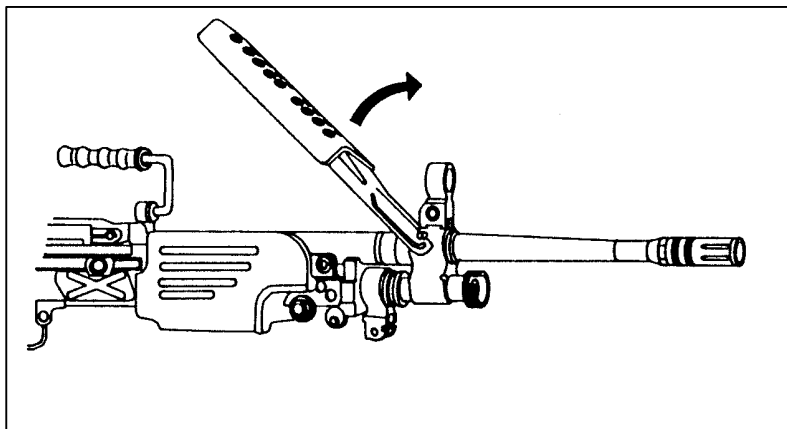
Removal of the operating rod, slide assembly, and bolt assembly.
